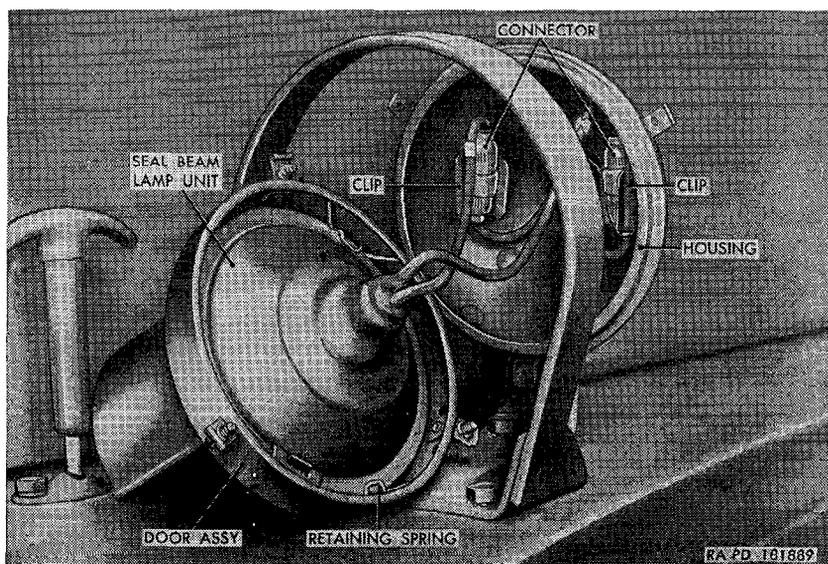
Blackout driving light-lamp-unit assembly withdrawn from housing.
